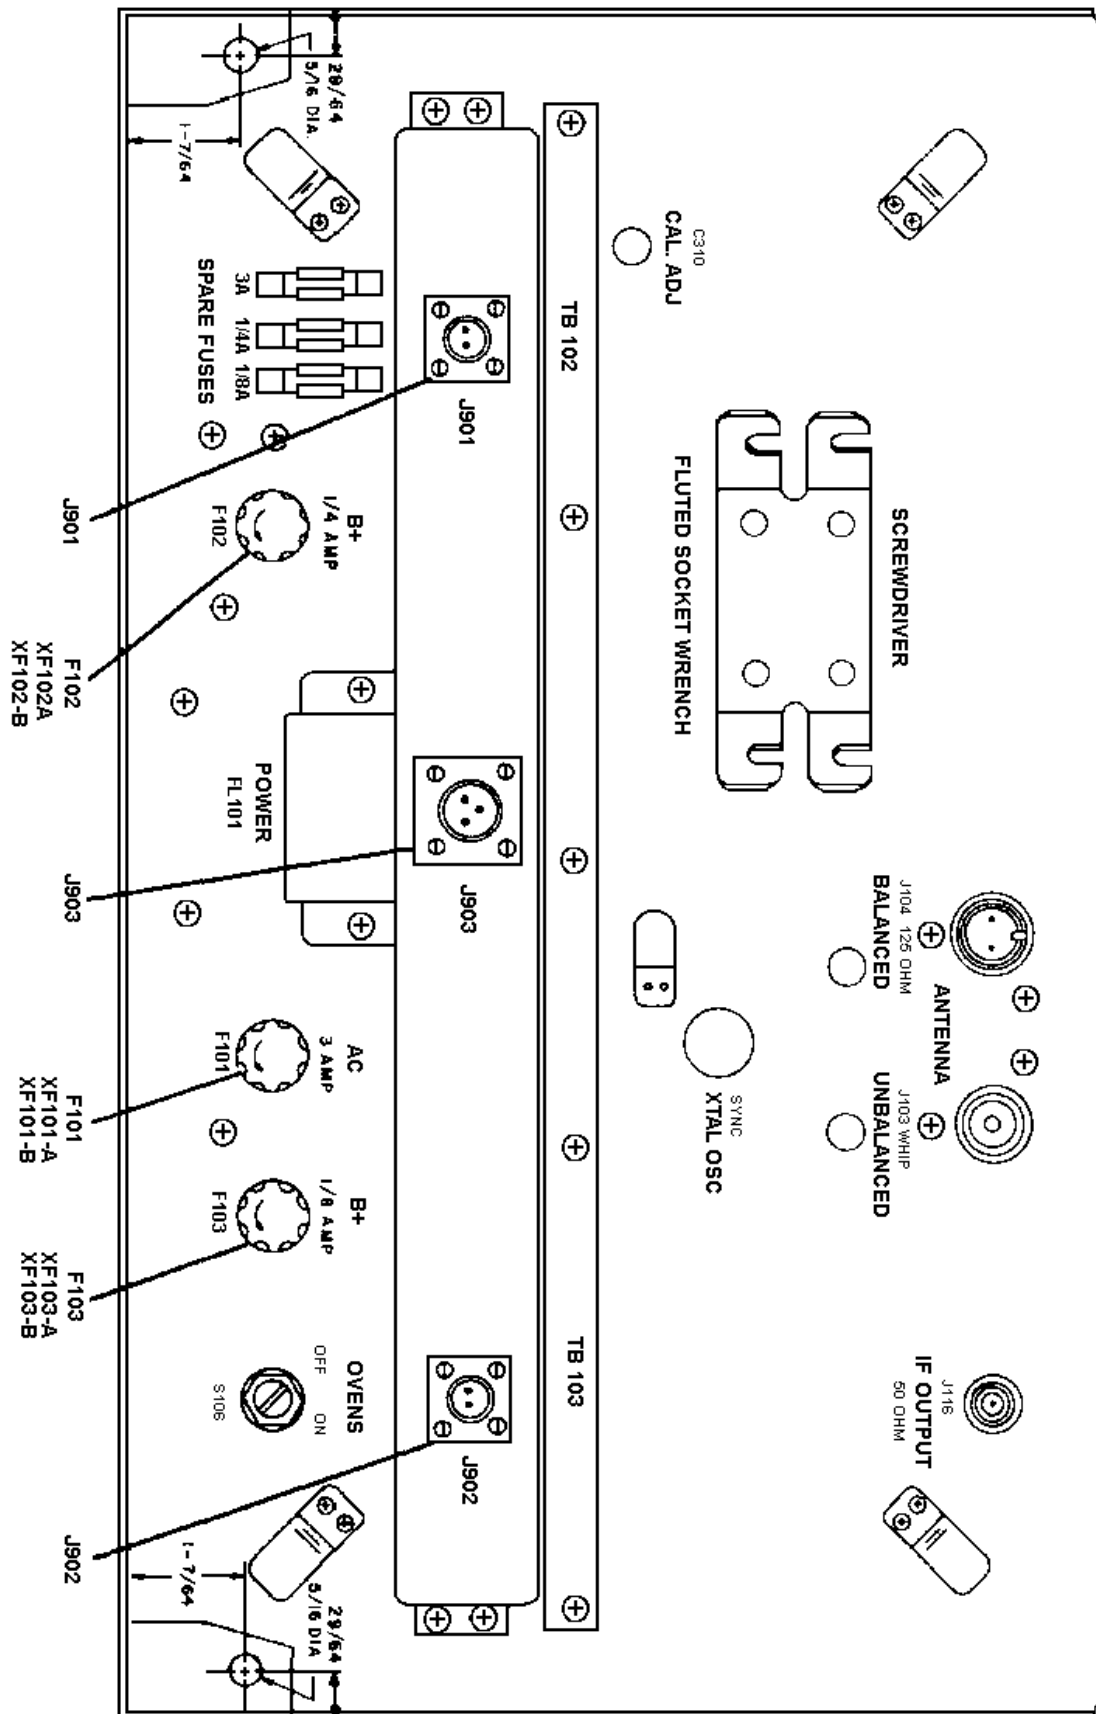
Rear Panel-Shipboard W/ 3 Fuses
